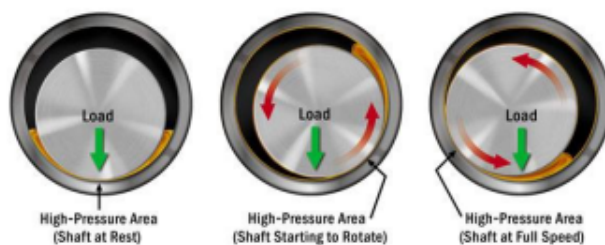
Journal bearing sketch with the developed oil film [8].
